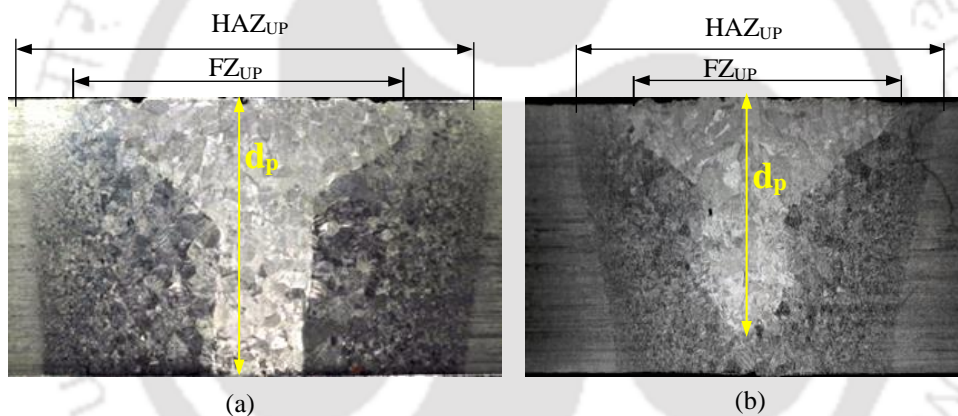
Weld bead geometry at (a) 200 mm/min (b) 400 mm/min welding speeds at constant 1800 W LBW power and 1 mm defocused focus position (d_p is penetration depth)
